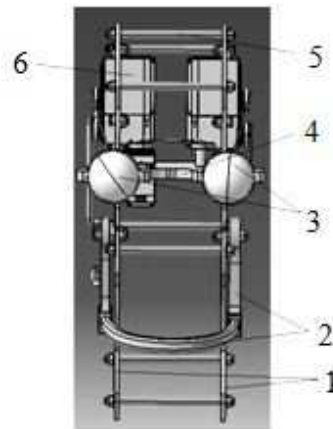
Robot assembly in CATIA: 1-Skeleton; 2-Mandible; 3-Eyes; 4-Eye support; 5-Spacer; 6-Servomechanism.
